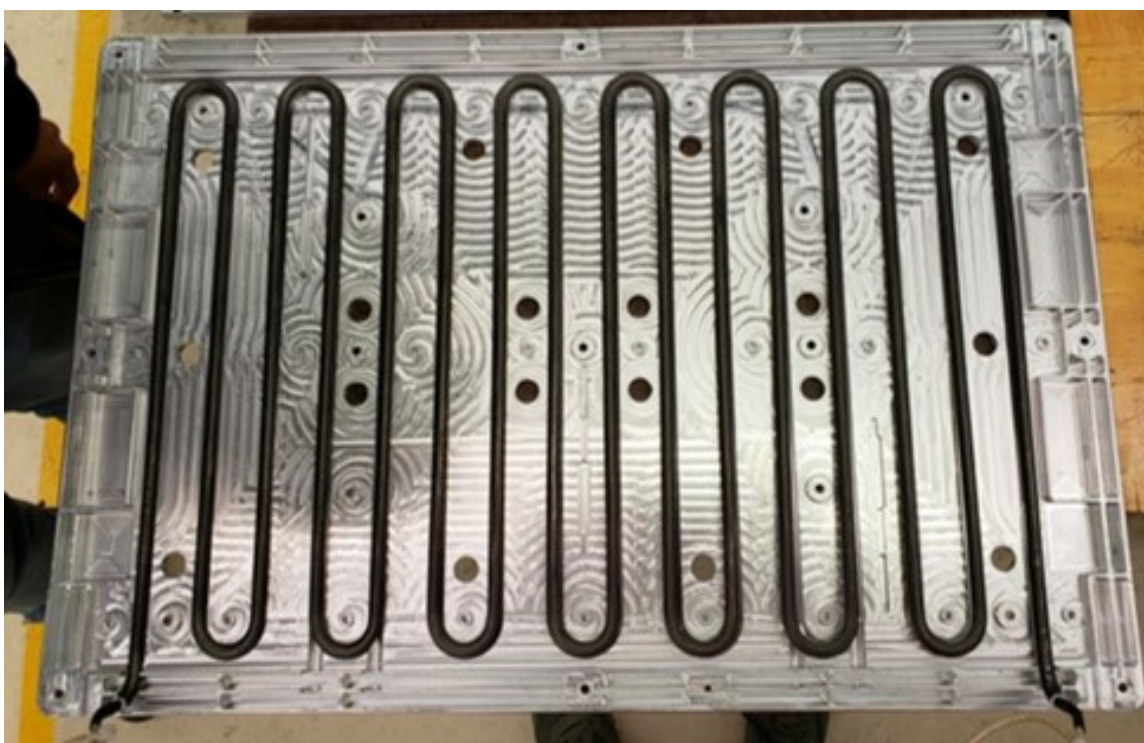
Photo of the physical heating element being fitted into the top assembly
